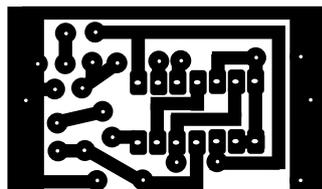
PCB Master (Scale 1:1) for the list of components see appendix A.
